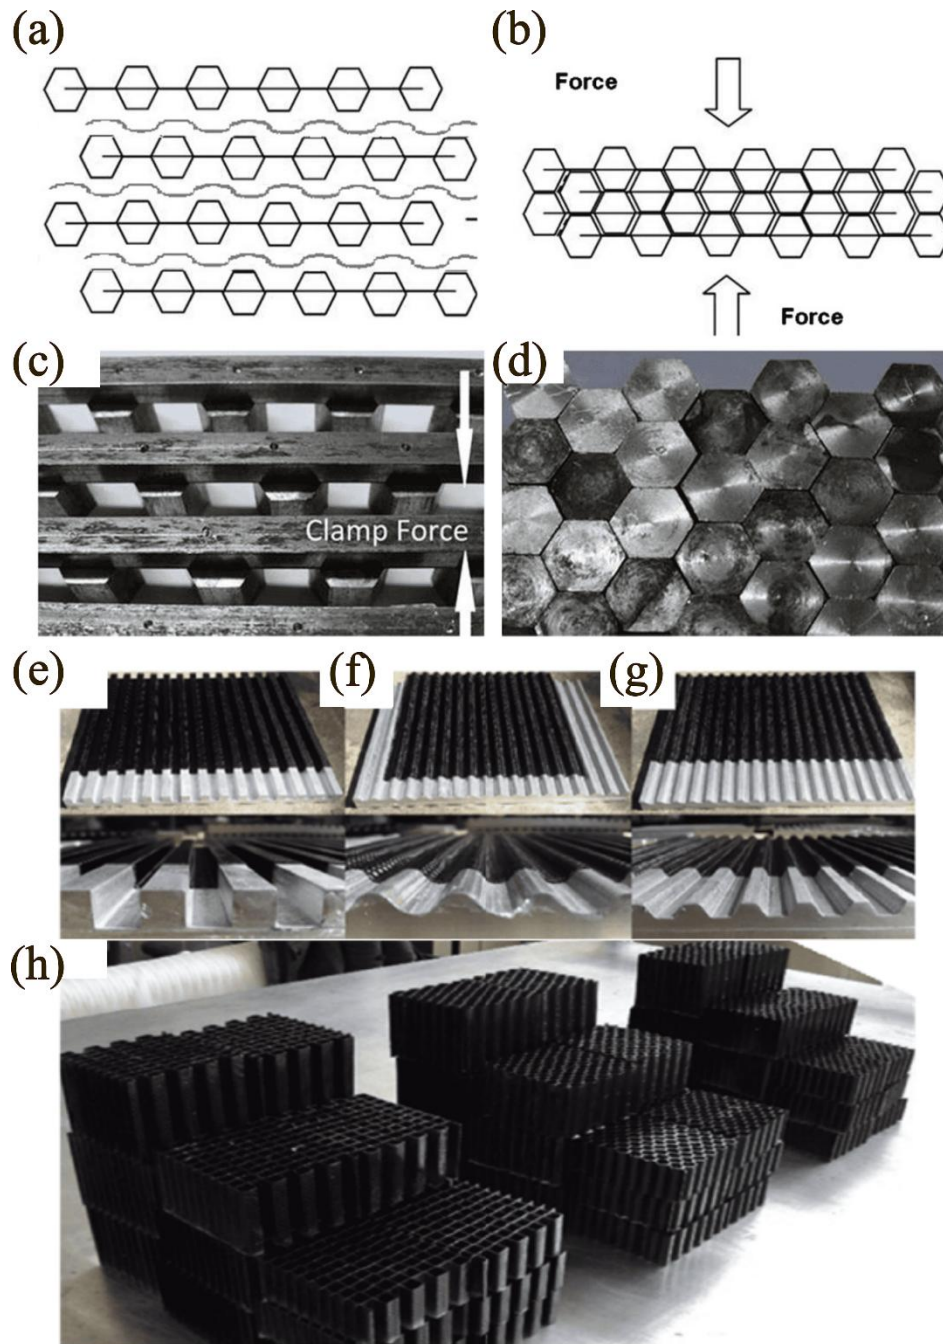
5. Hot press molding with lateral compression [24]: (a) fabrics placed in the mold, (b) compression force applied to the combs, (c) open mold view, (d) closed mold view. Hot press molding with corrugated molds [8]: (e) square molds, (f) circular molds, (g) hexagonal molds, (h) fabricated honeycomb blocks.
